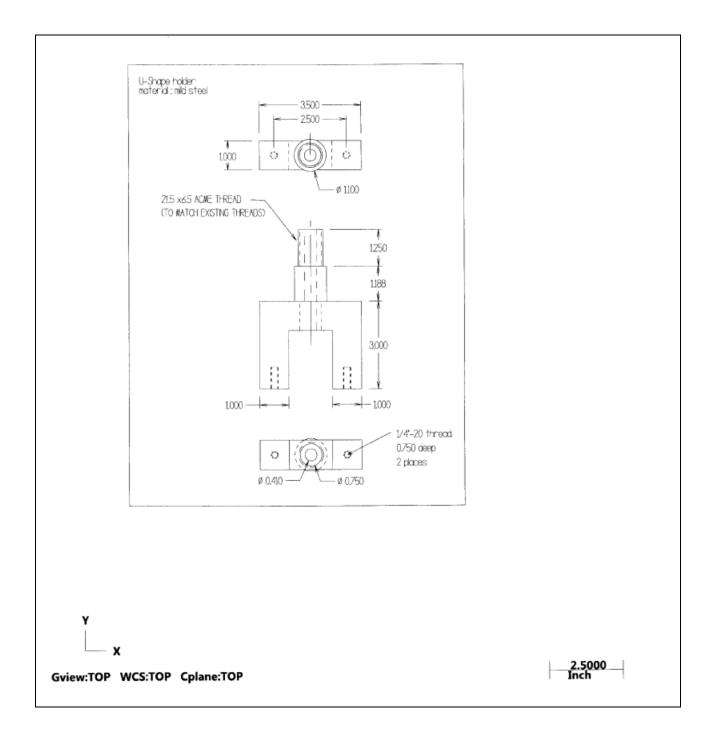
Technical drawing of the U-shaped steel screw adaptor for connection of threaded drive rods to the top of the Tech-Ops gravity corer (3 views)
